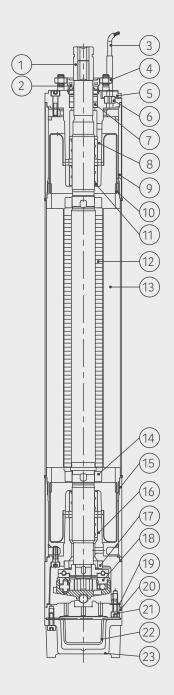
Cross-section view of 4 inch Submersible motor: 6 and 7.5 HP
